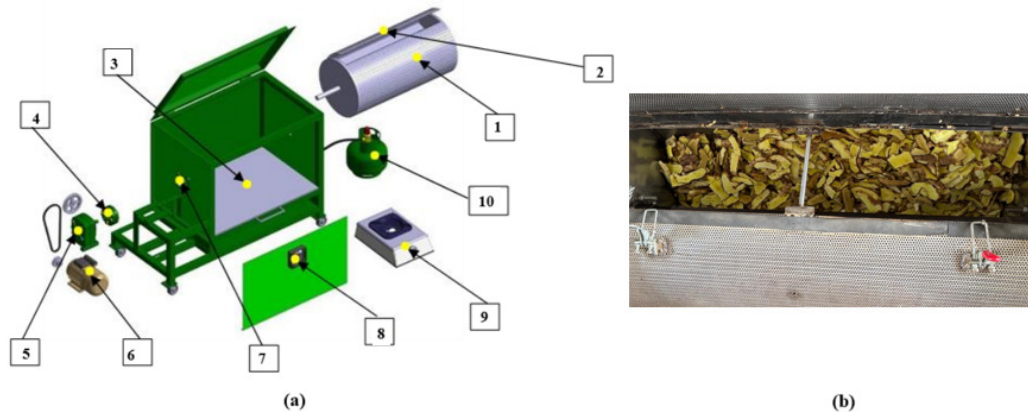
(a) Schematic for rotary dryer run with LPG energy, and (b) Testing samples of turmeric slices. (1. Rotary cylinder, 2. Rotary cylinder cover, 3. Heating plate, 4. Gearbox connector, 5. Gearbox, 6. Electric motor, 7. Bearing, 8. Exhaust fan, 9. Gas stove, 10. LPG cylinder)
